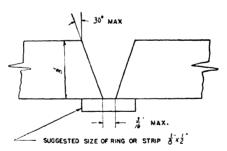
Butt joint for operator Qualification, for Plate or Pipe %" thick
